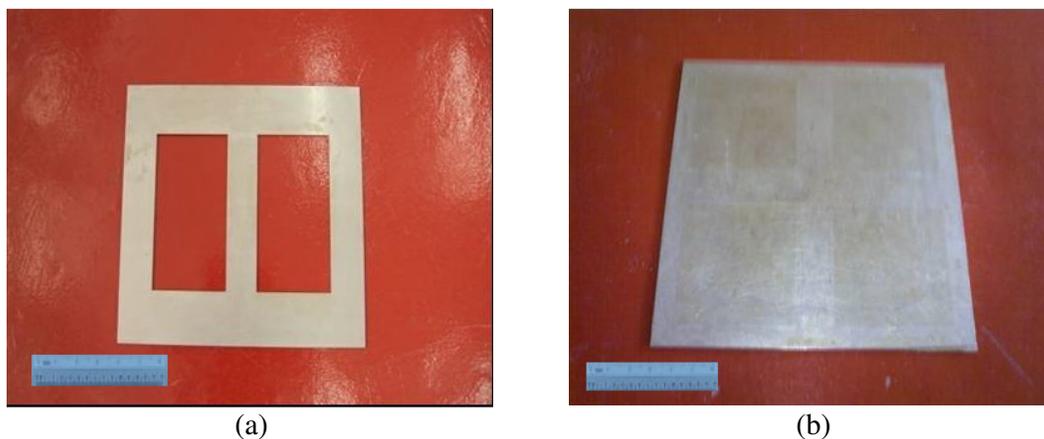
(a) and (b): Moulds used to fabricate the Kenaf/epoxy specimens
